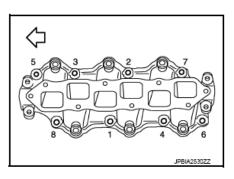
Identifying Intake Manifold Mounting Bolts With Tightening Sequence Courtesy of NISSAN NORTH AMERICA, INC.
